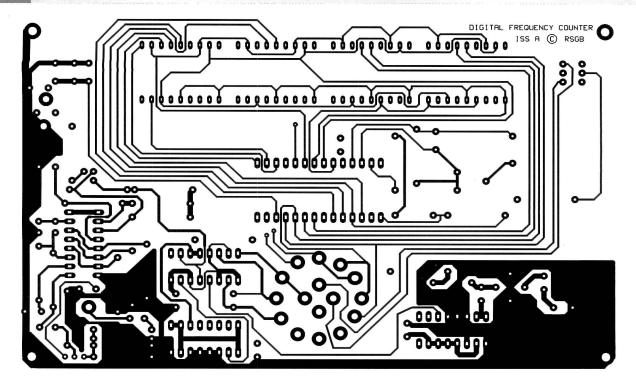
600MHz frequency counter PCB (bottom layer)
